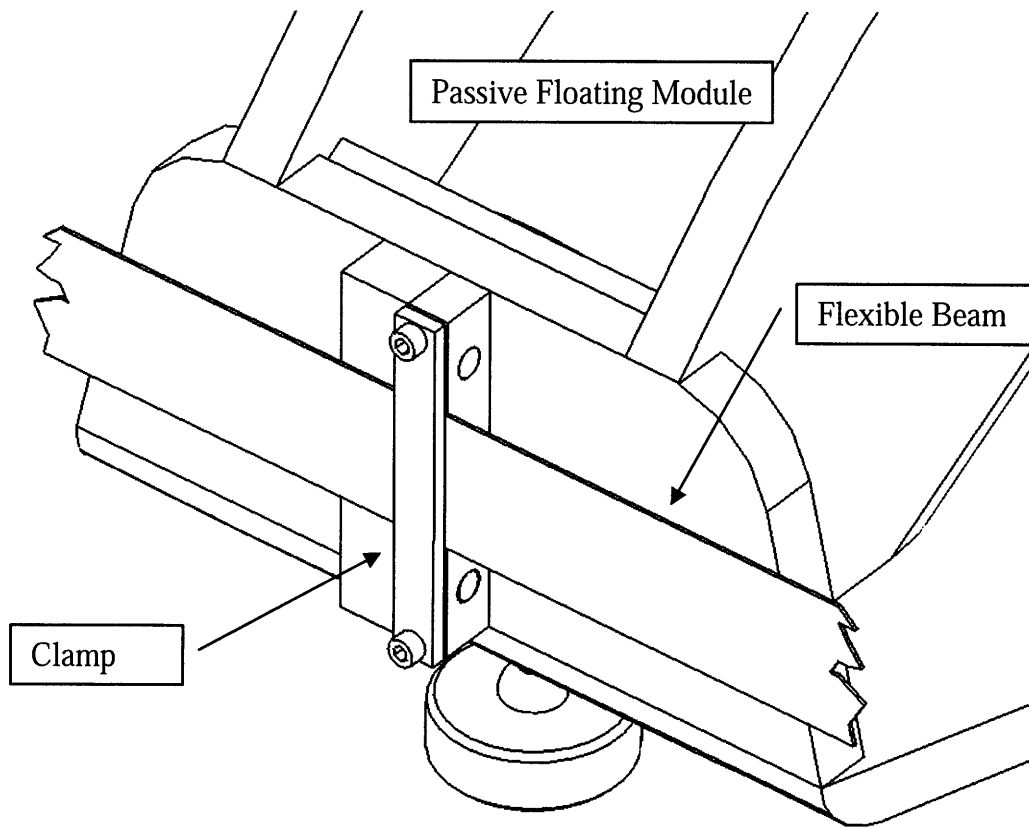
A clamp that attaches a passive floating module to the center of a flexible beam.
